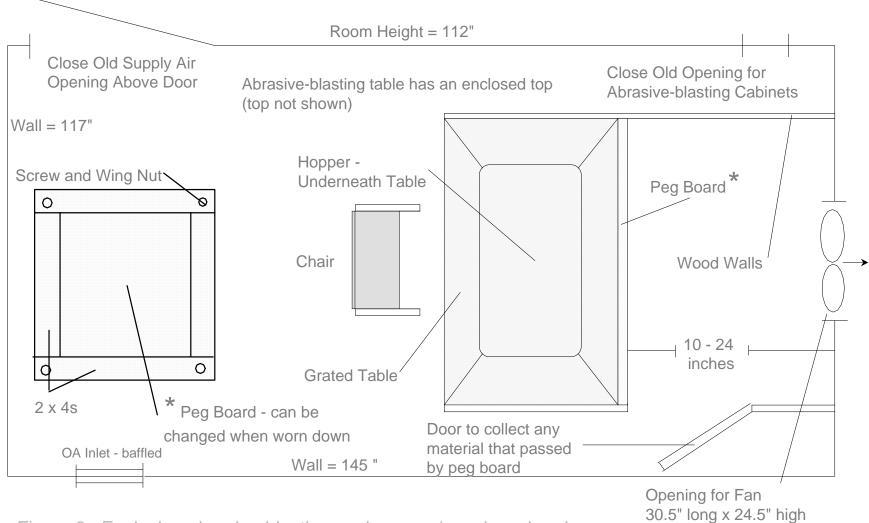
Enclosing abrasive-blasting work area w/ peg board and grated table to catch abrasive-blasting material for recycling purposes.
